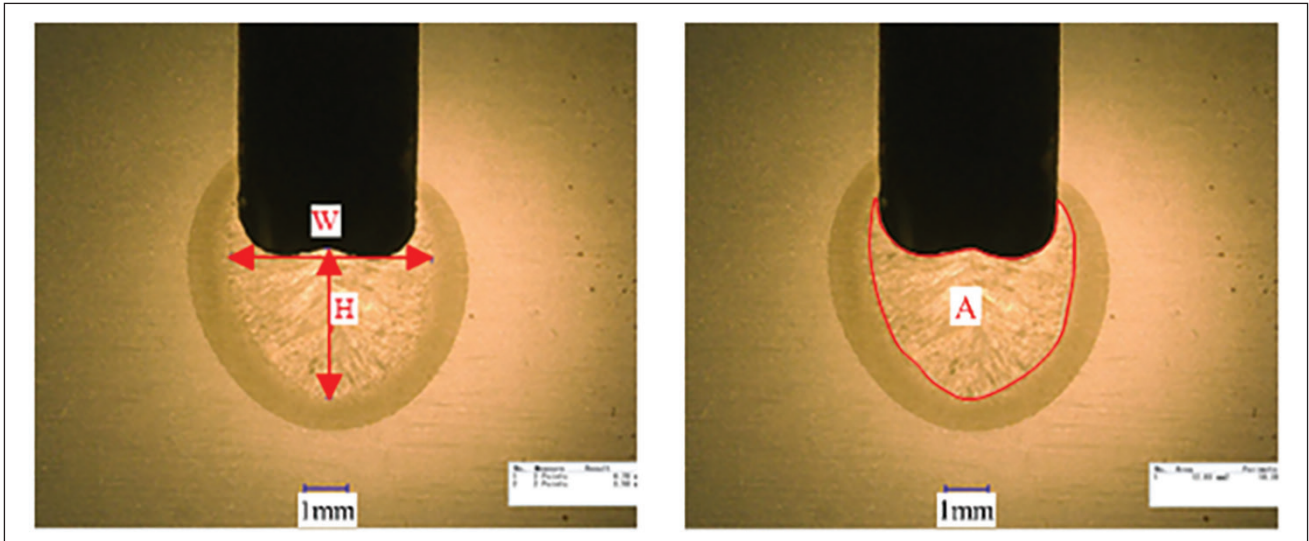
Dimensions of the weld cross-section sizes.
